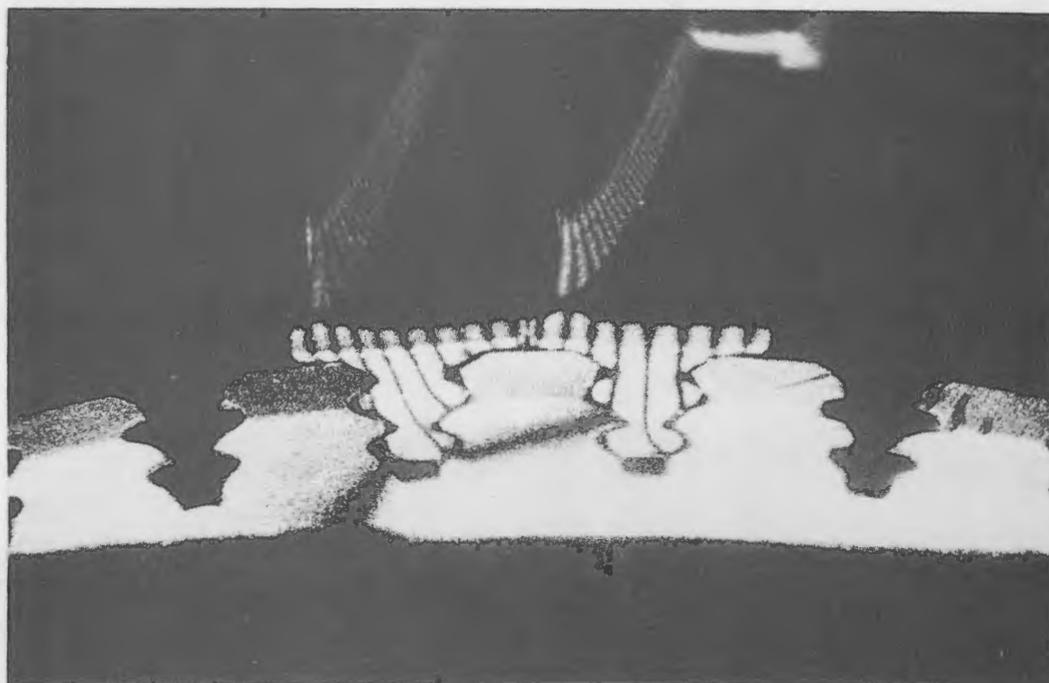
SIDE-ON VIEW ILL-FITTING BLADE
